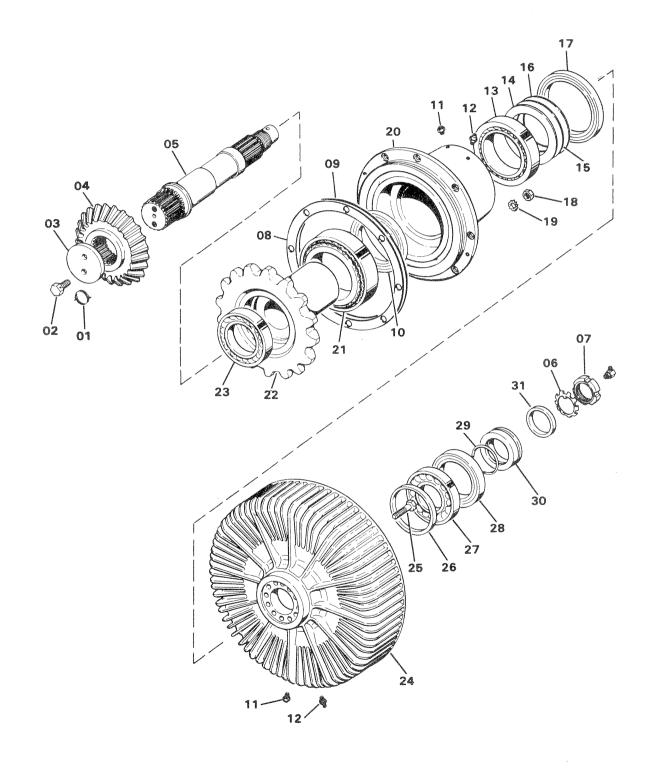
B-3. Horizontal Swing Shaft (2910J30-5)
